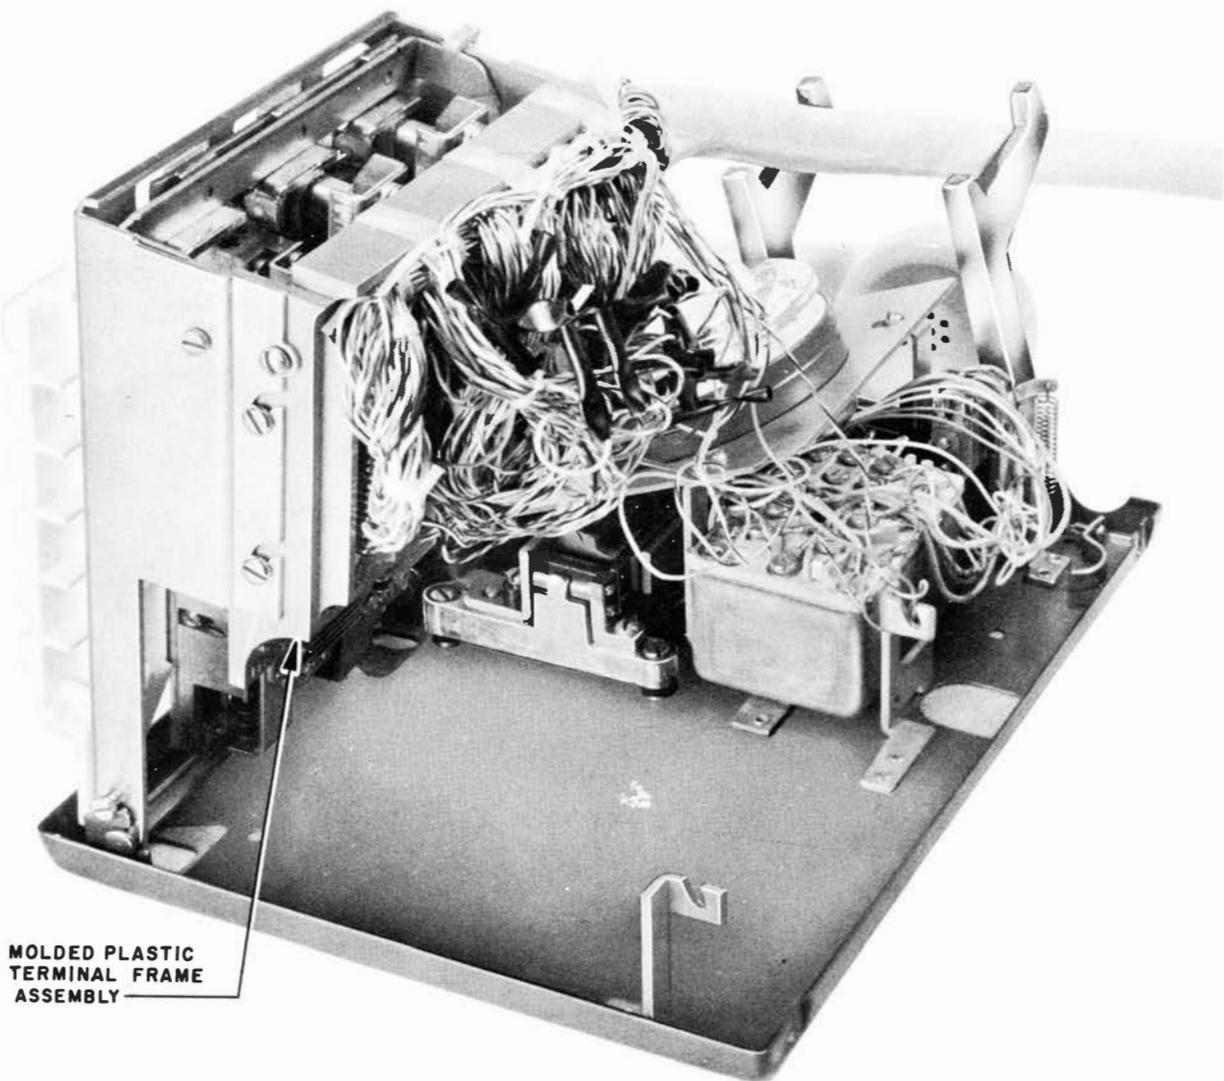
630-Type Telephone Set, Key Frame Lifted
